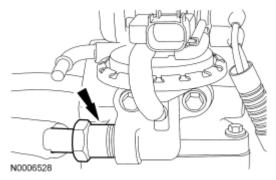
EGR Tube Nut At EGR Courtesy of FORD MOTOR CO.
